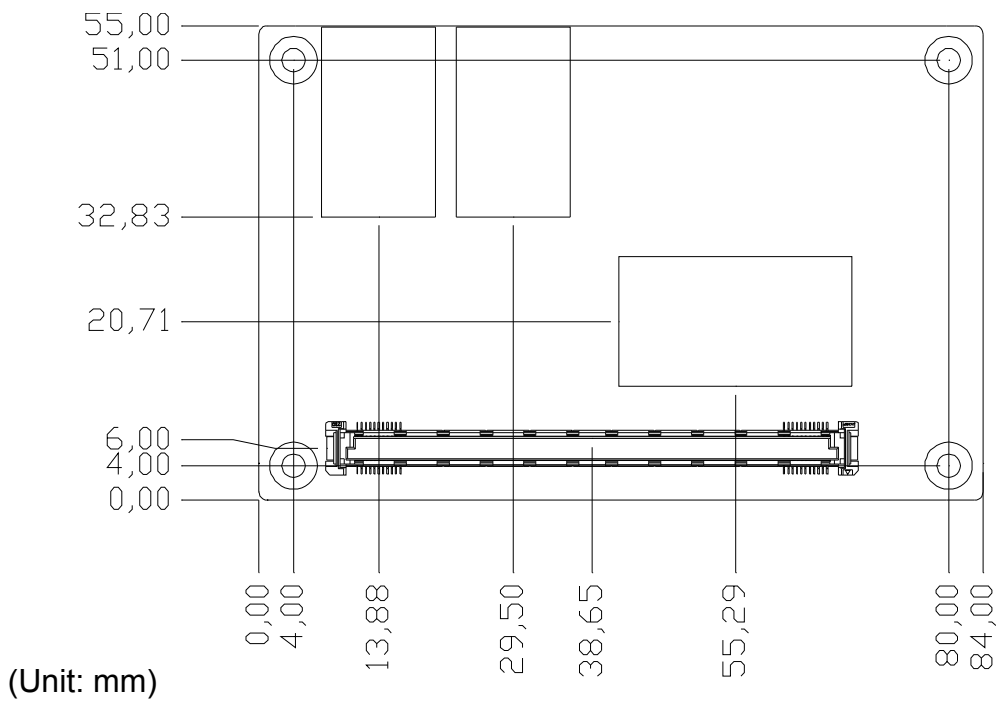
SOM-7562 B1 Rear Side Drawing
